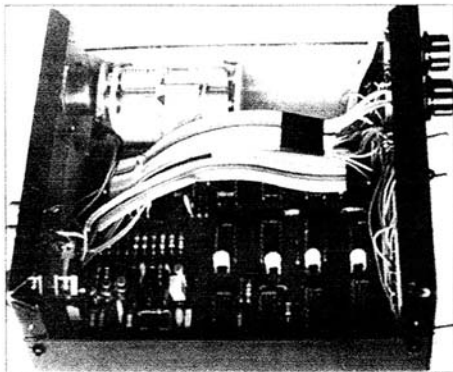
Internal view of keyer. All components are mounted on a high quality PCB, and main cabling runs use ribbon cable for neatness. The wiring harness is arranged to allow the board to be removed for servicing whilst still connected.
